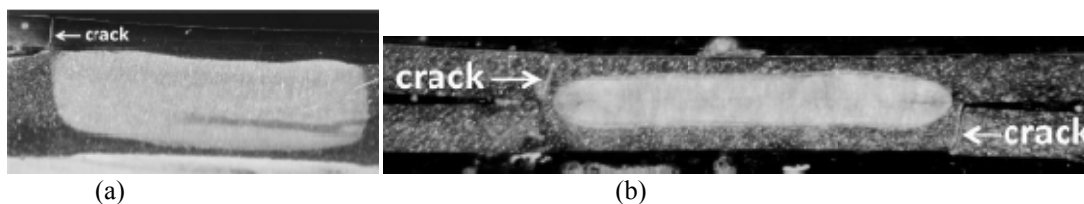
Initial crack location: (a) 3.0-1.0 mm joint (b) 1.0-1.0 mm joint
